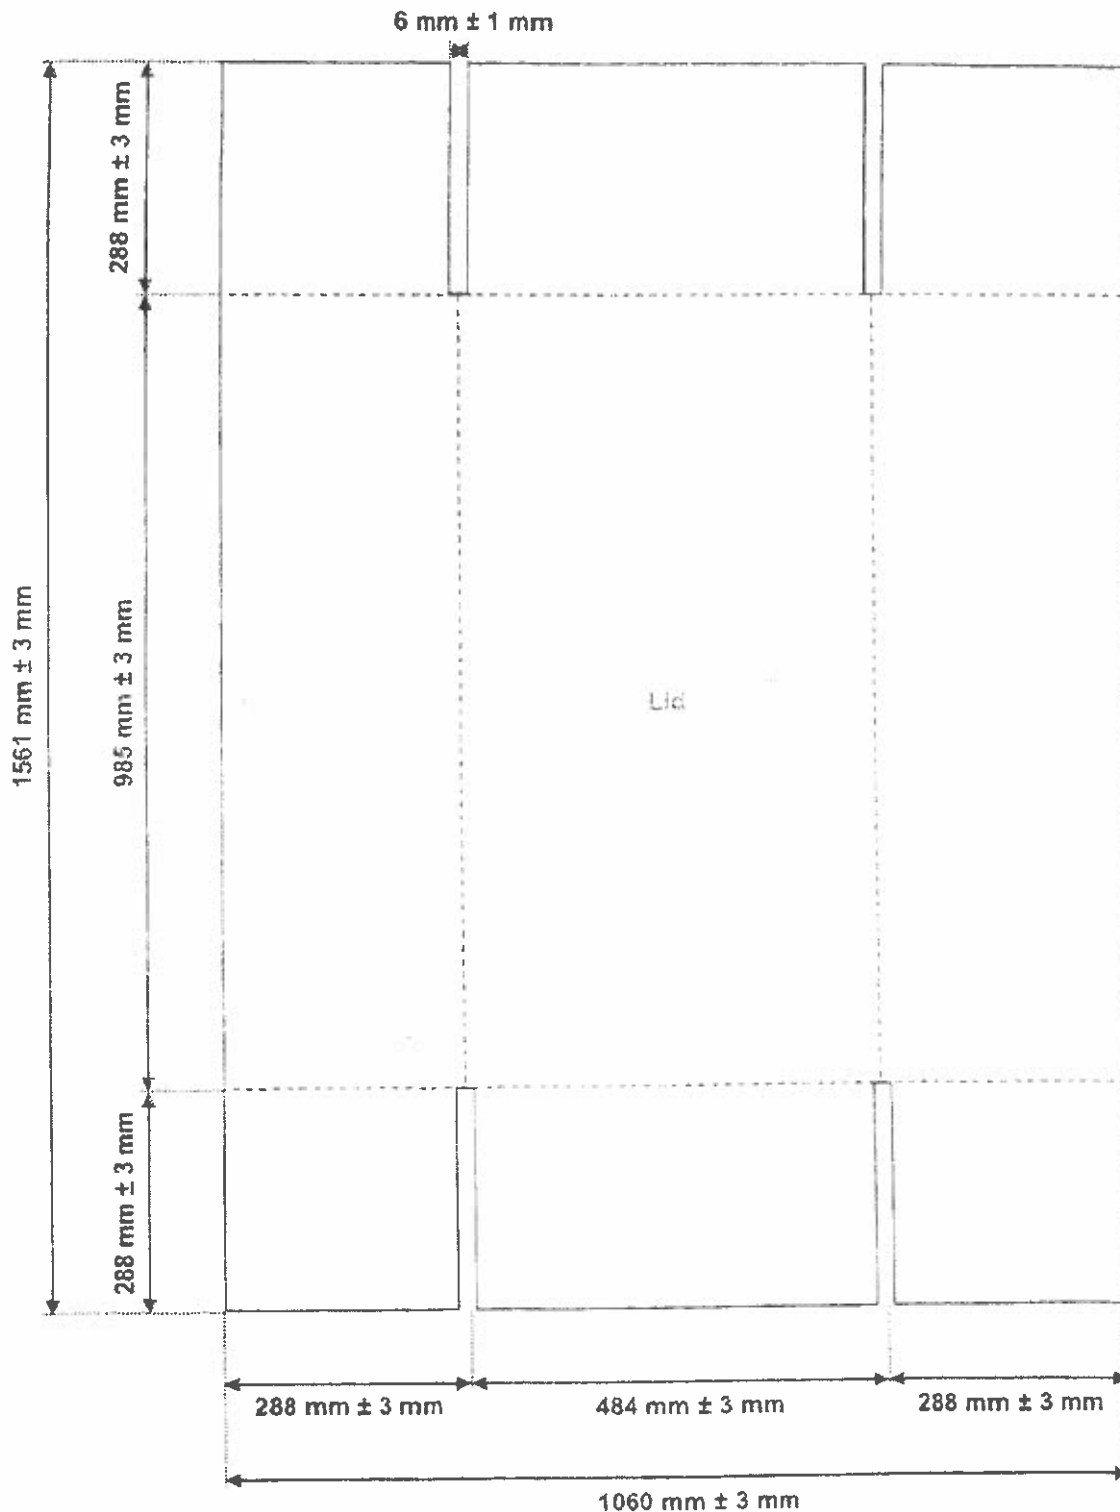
Dimensions of the lid component of the telescopic board box (flat measurements)
